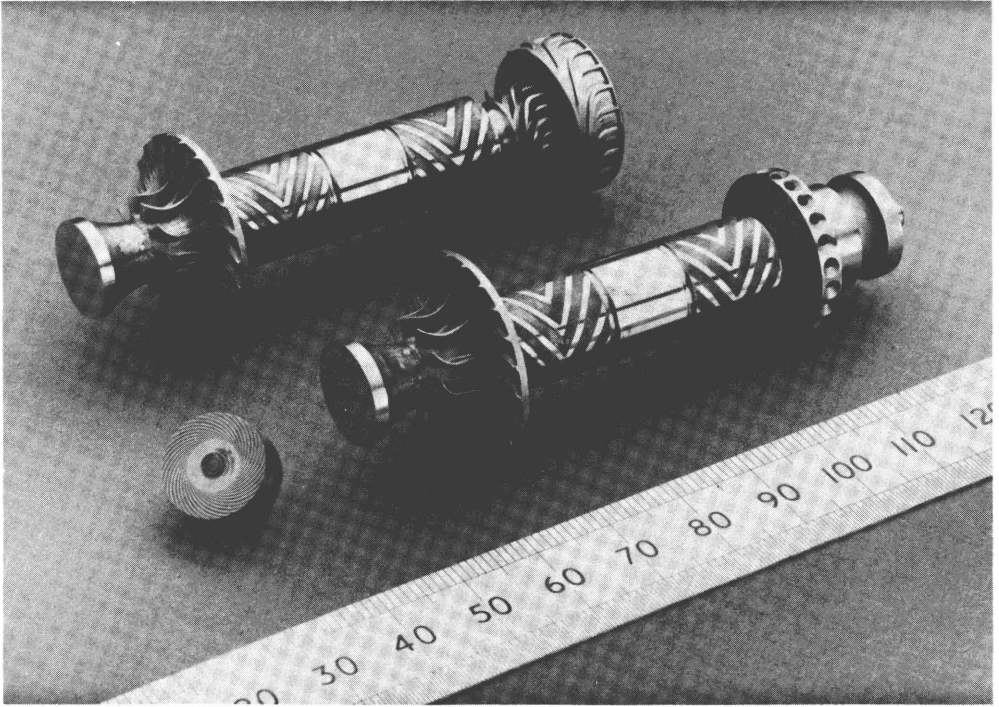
Turbomachine rotors of an O.R.C. engine driven heat pump
